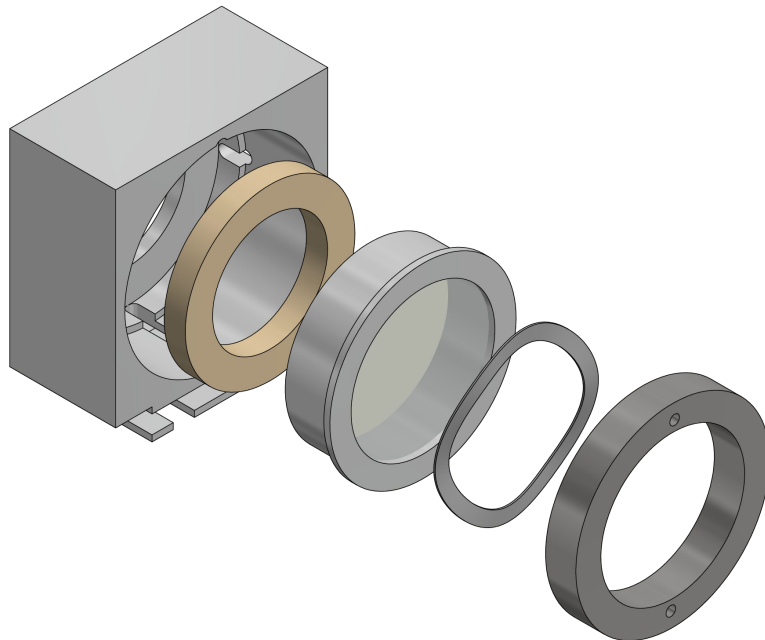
A schematic drawing of the components of the mirror actuator with a mirror holder. It includes from left to right, the mirror mount, a large ring piezo, the mirror holder assembly, a wave washer to provide restoring force, and the retaining ring to compress the wave washer.
